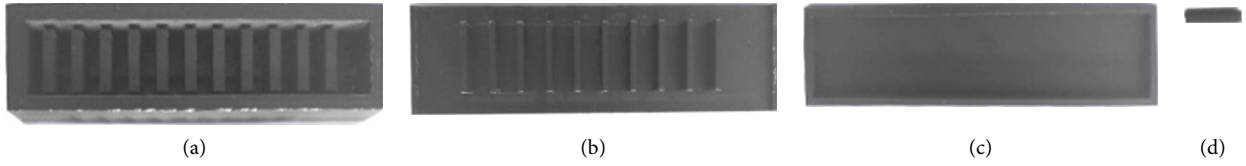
Mould structure. (a) Cavity mould main body. (b) Cavity mould upper cover. (c) Nonretractable layer mould. (d) Gas inlet forming plug.
